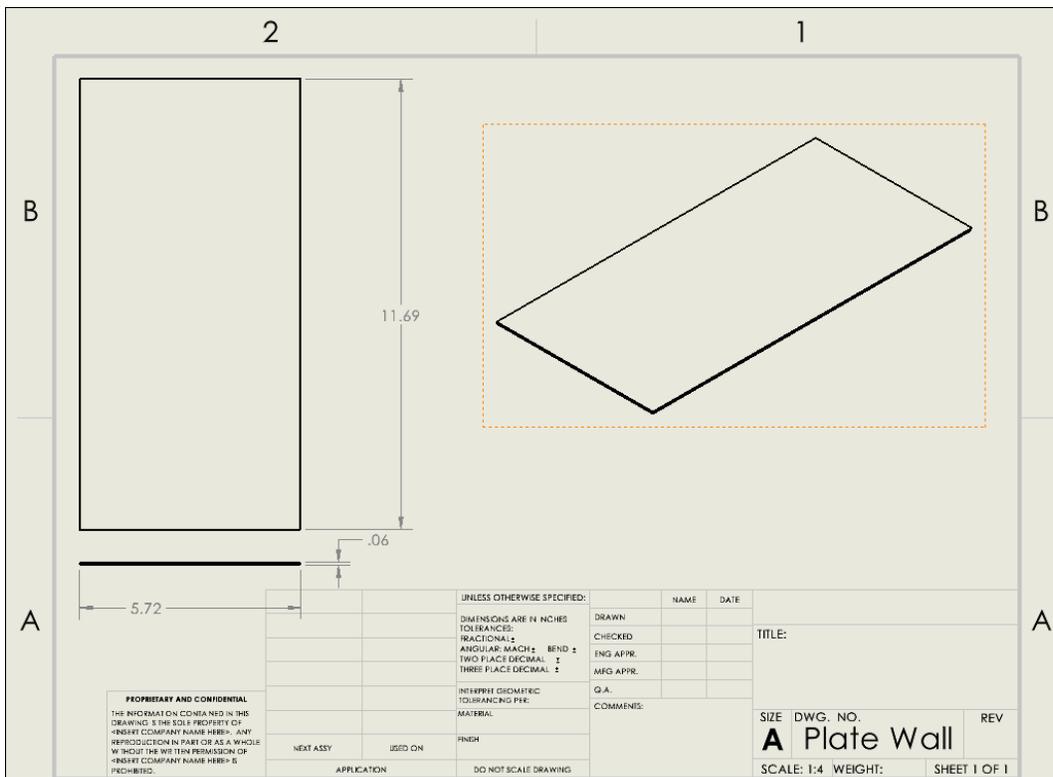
Mechanical drawing of UVI-GREAT structure enclosing wall
